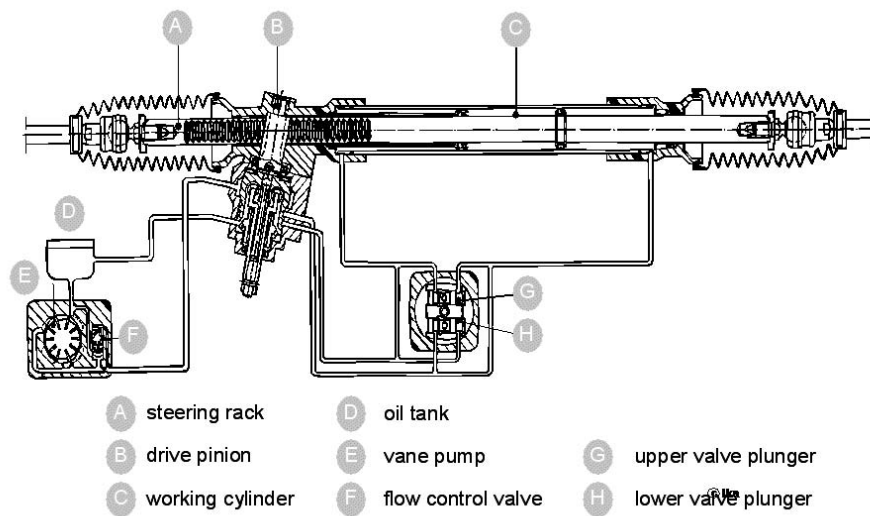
Rack-and-pinion power steering, ZF
